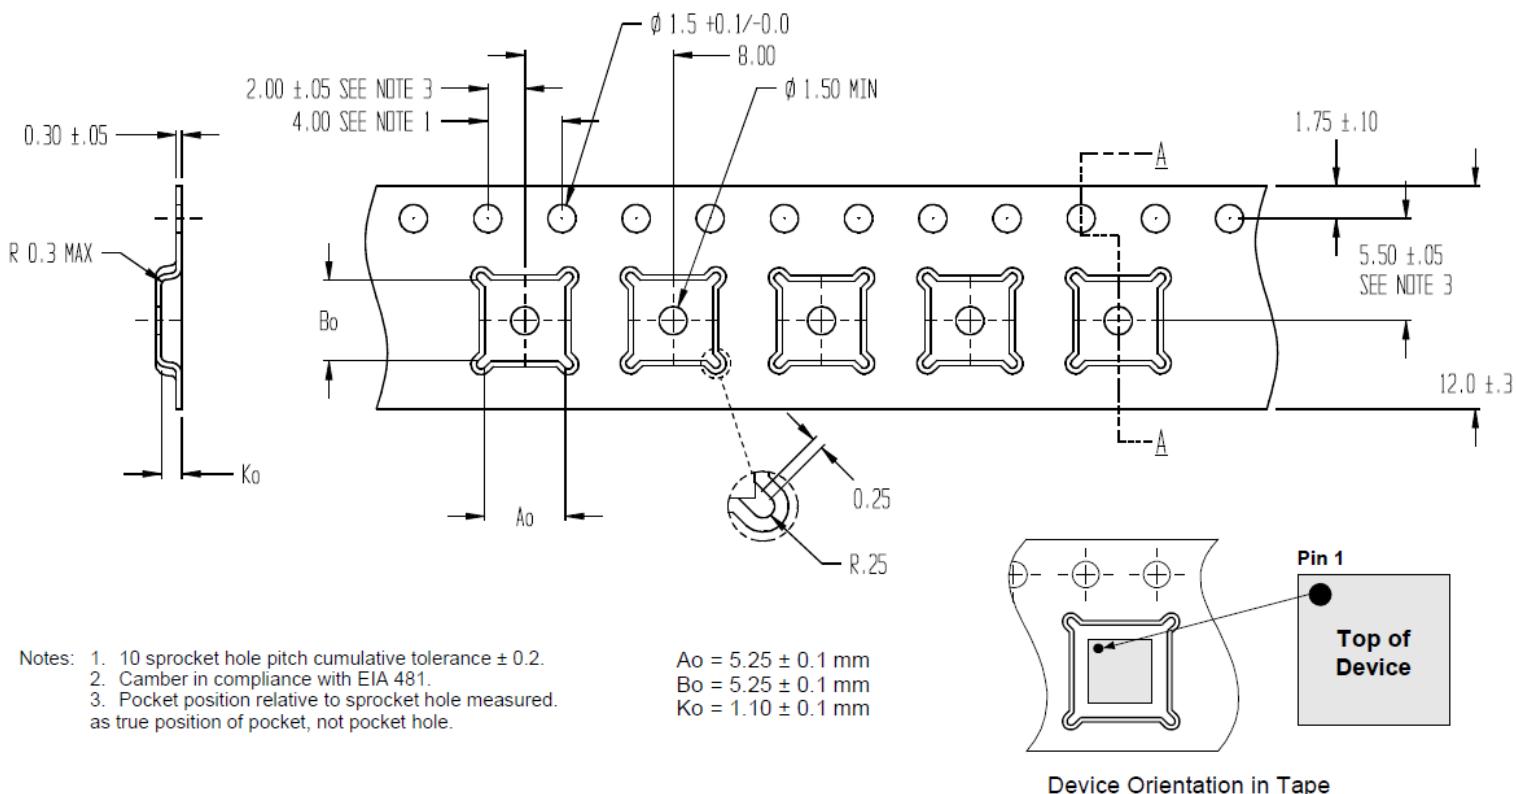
Tape and reel specification for the 32-lead 5×5 mm QFN package
